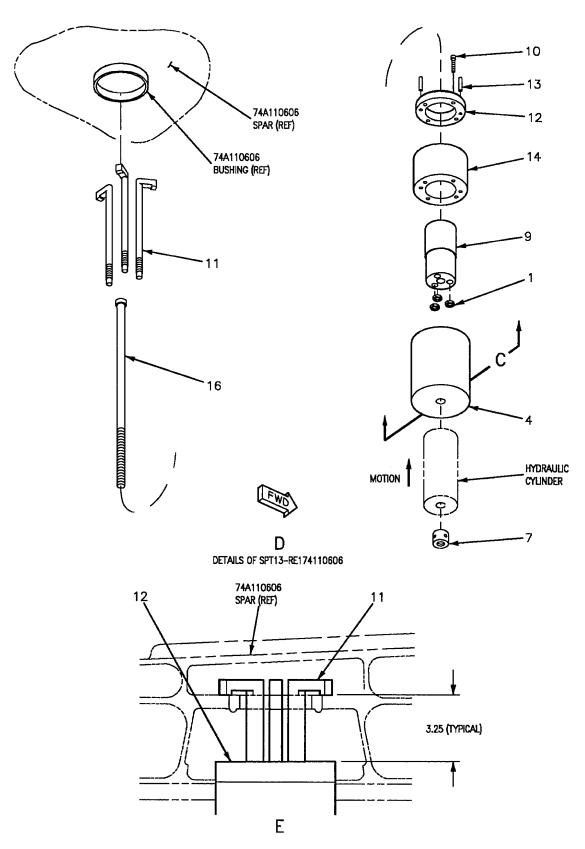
Removal of Pylon Post Bushings (Sheet 3)
